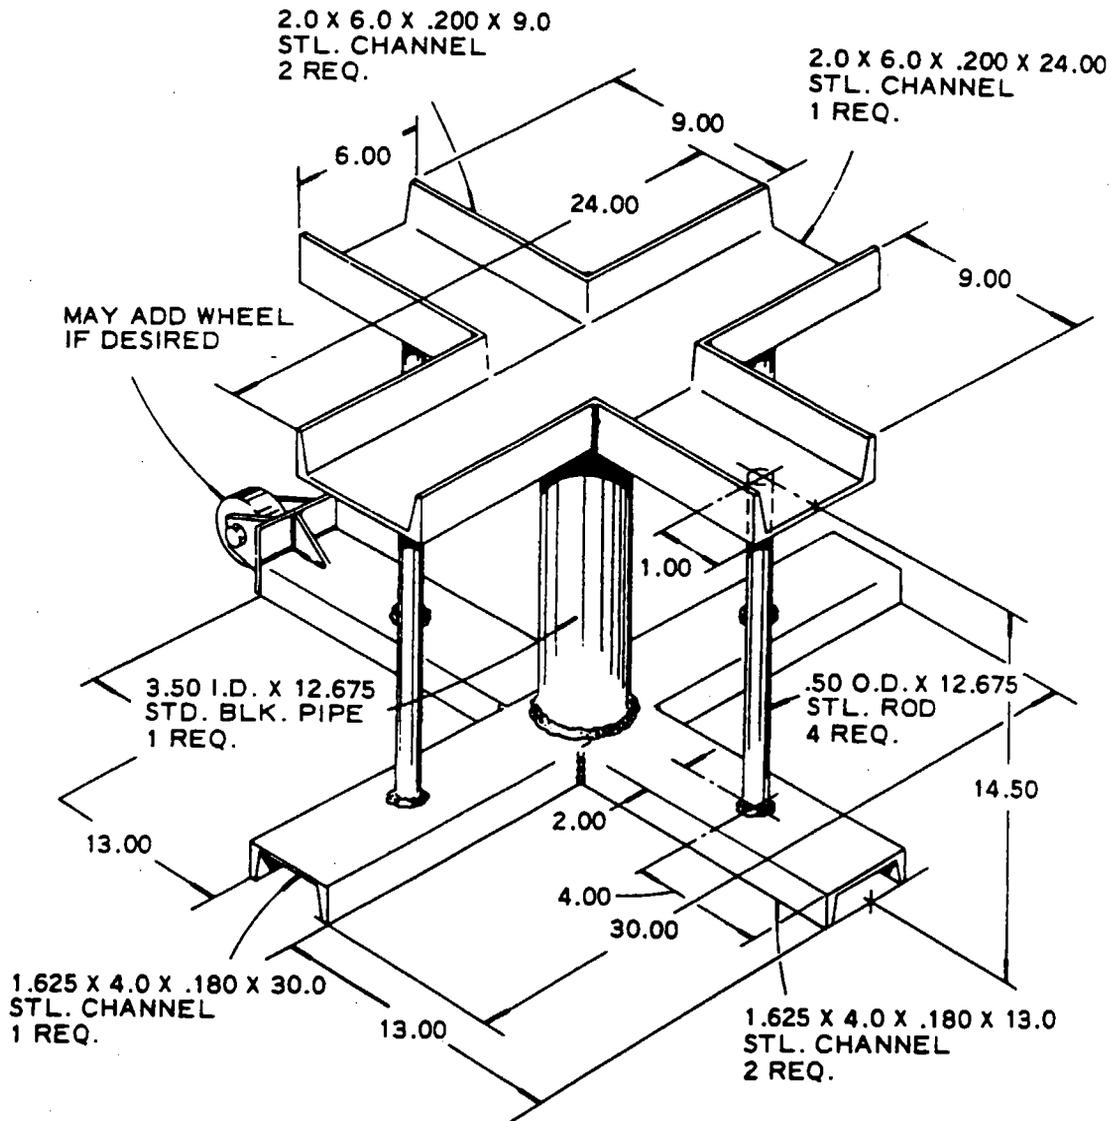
Fabricated Jack Stand for Piper Jack, Part No. 18338-00
